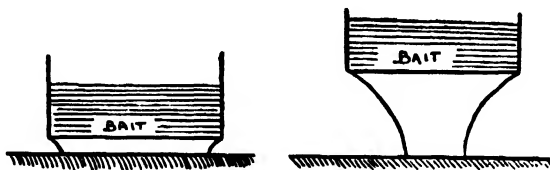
CLARK'S METHOD OF DRAWING SHEET GLASS.
